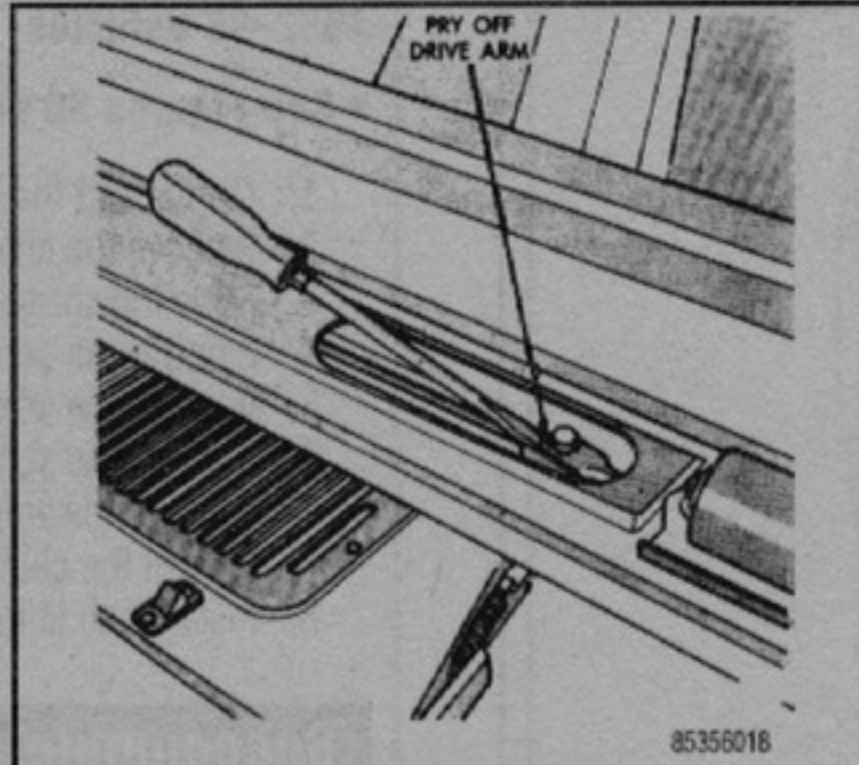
Using a suitable prying tool carefully pry off the drive arm
